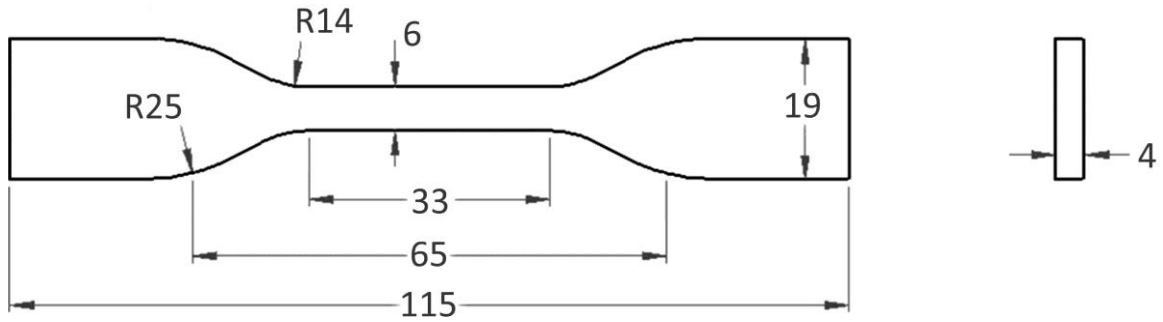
Geometry of the tensile test specimens; dimensions are in millimeters
